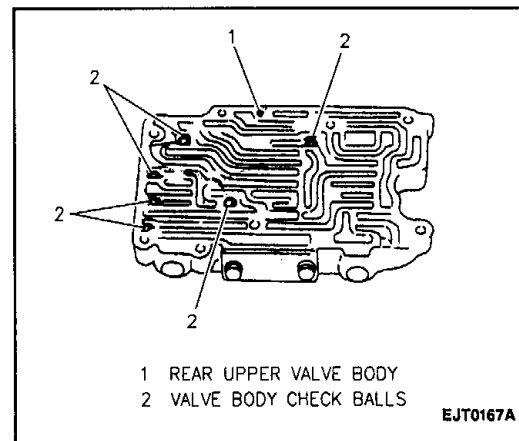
Inspecting Rear Upper Valve Body Assembly (03-72LE, 4-Speed)
